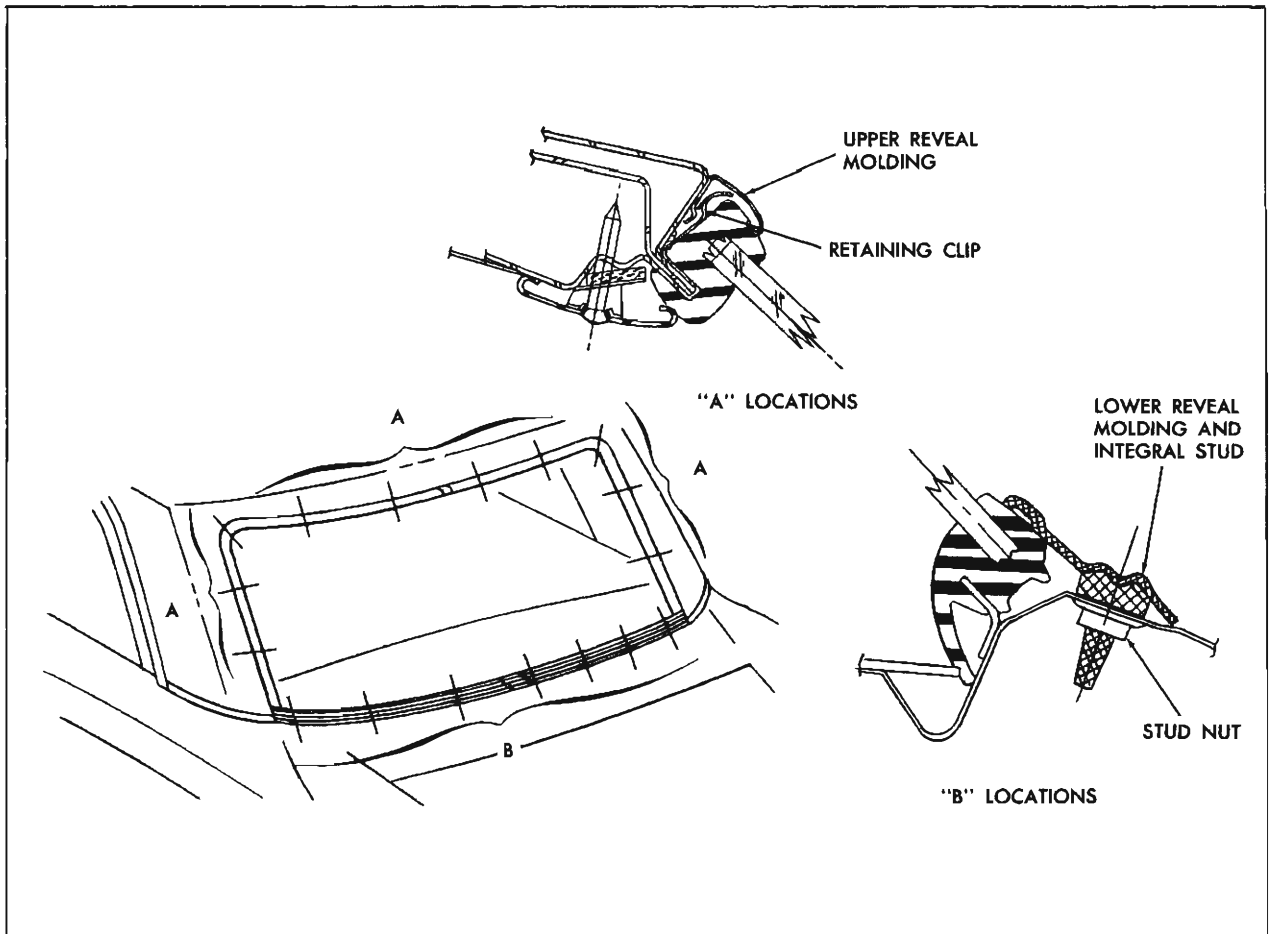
Back Window Reveal Moldings (17 Style)
